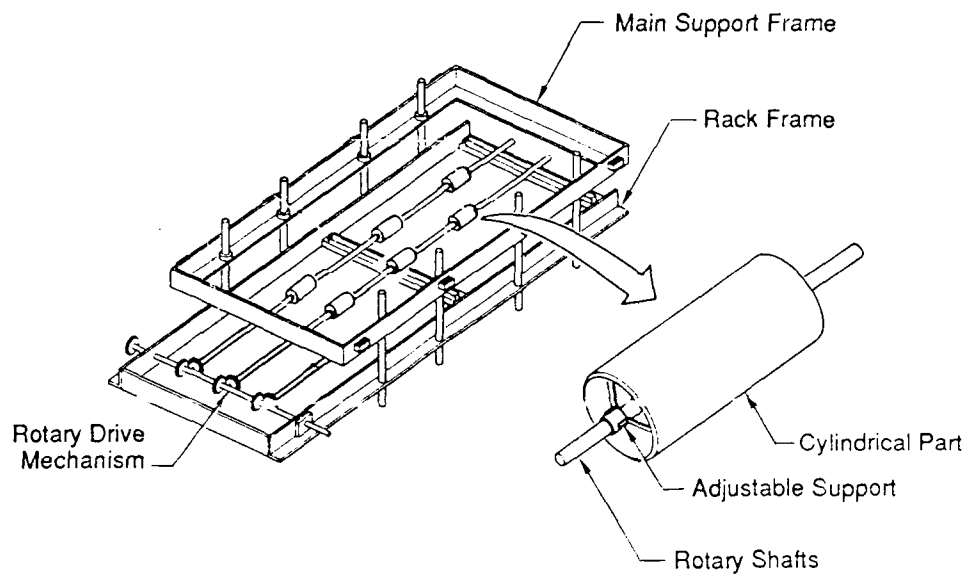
Rotary Fixture for IVD Aluminum Processing.
